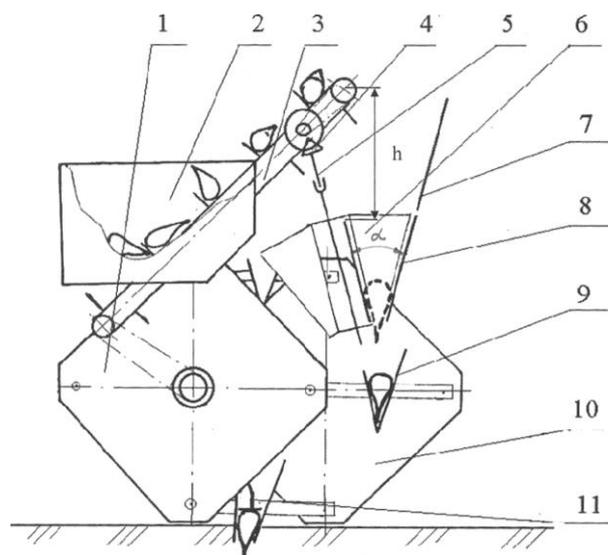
a leading planting disc –1, a hopper – 2, a supply conveyor – 3, the bevel gear – 4, shaft of leading scraper conveyor – 5, scraper conveyor – 6, the impact-absorbing board – 7, the guiding surfaces – 8, planting cone– 9, led planting disc– 10, the ejector – 11.
